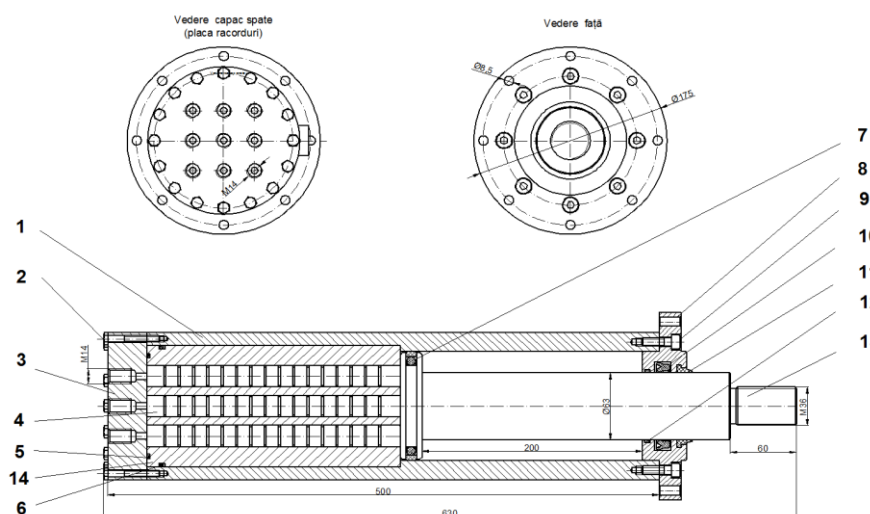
VDLA Hybrid with binary coded surfaces [6]
